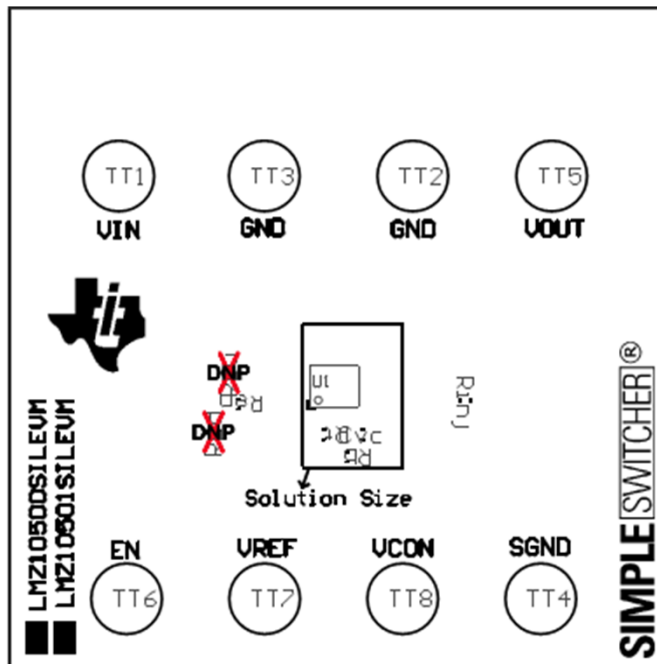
Evaluation Board Assembly (DNP = not populated components)
